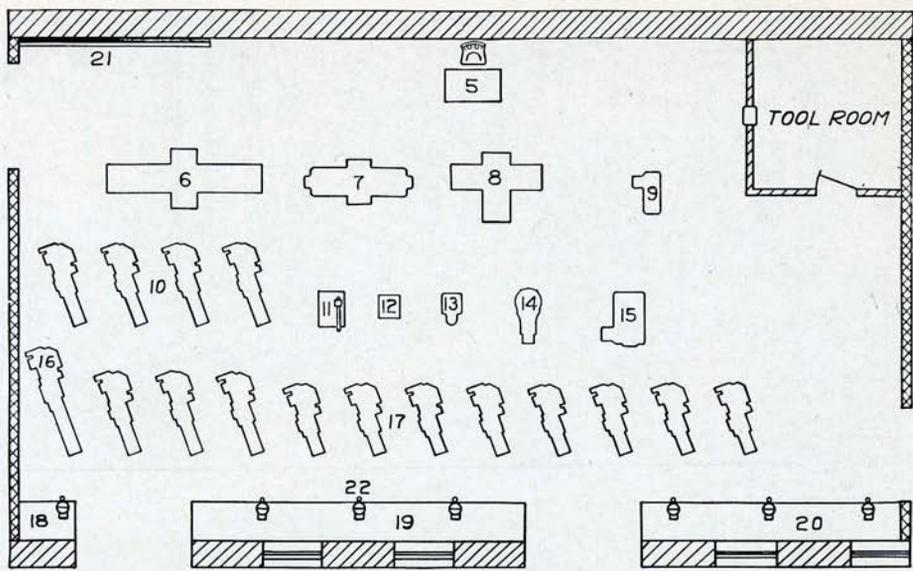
Practical Vocational Machine Shop Floor Plan Layout
